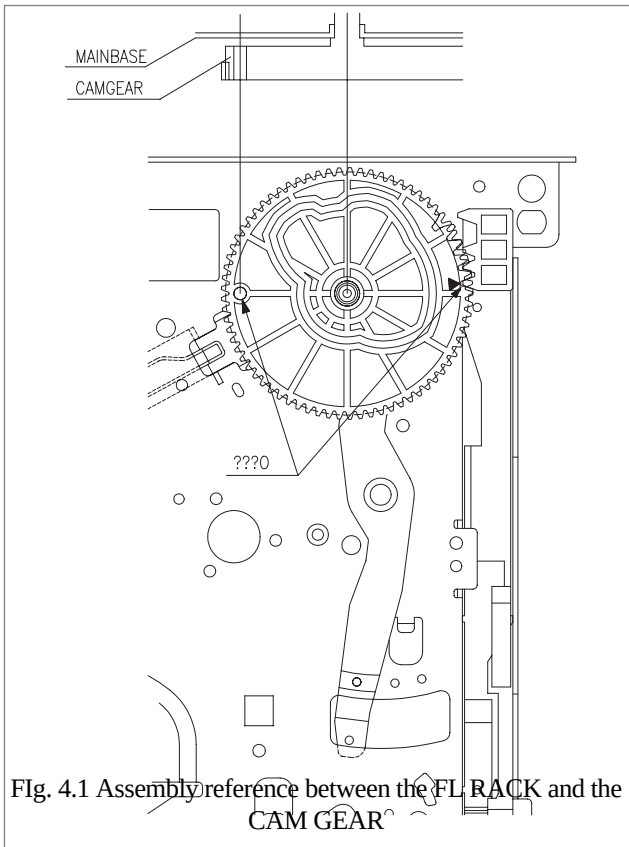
Assembly reference between the FL RACK and the CAM GEAR
